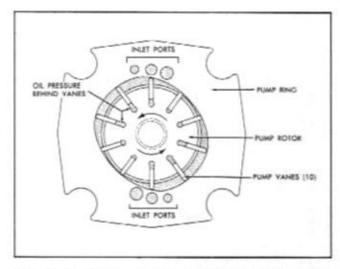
Oil Flow in Rotor and Vanes in Pump Ring
